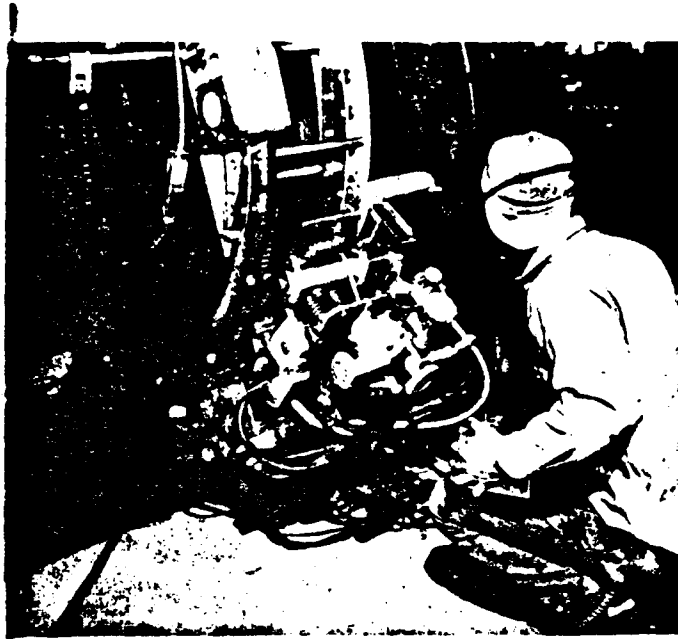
Automatic GMAW welding machine for large pipe.
